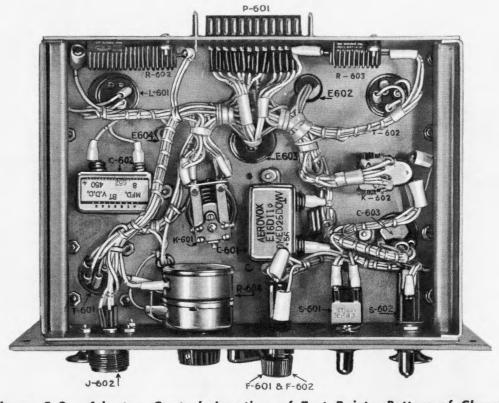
Adapter, Control, Location of Test Points, Bottom of Chassis
